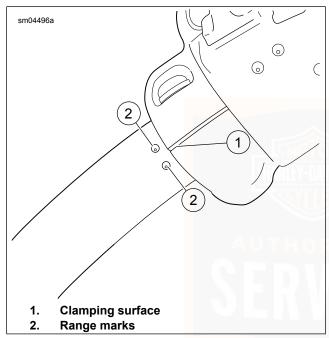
Right Hand Control Assembly to Handlebar Alignment
